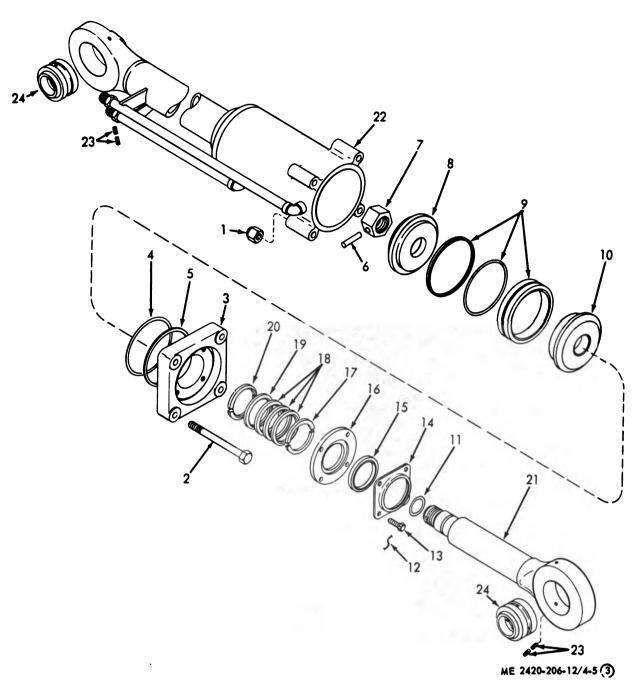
Bulldozer lift and tilt cylinder, removal, disassembly, reassembly, and installation (sheet 2 of 3).
